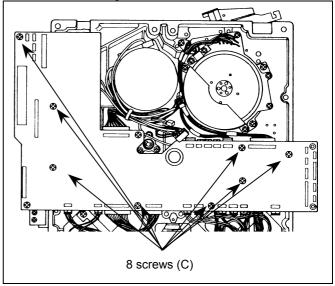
Mech. Intermidiate P.C. Board Removal
